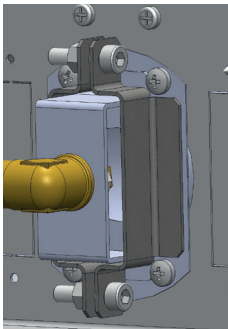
Air shutter of the oven burner (1 - consists of two plates screwed together)
